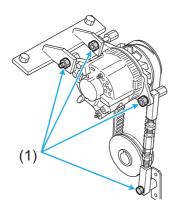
Belt Tension - Adjust (Retaining Bolt)
